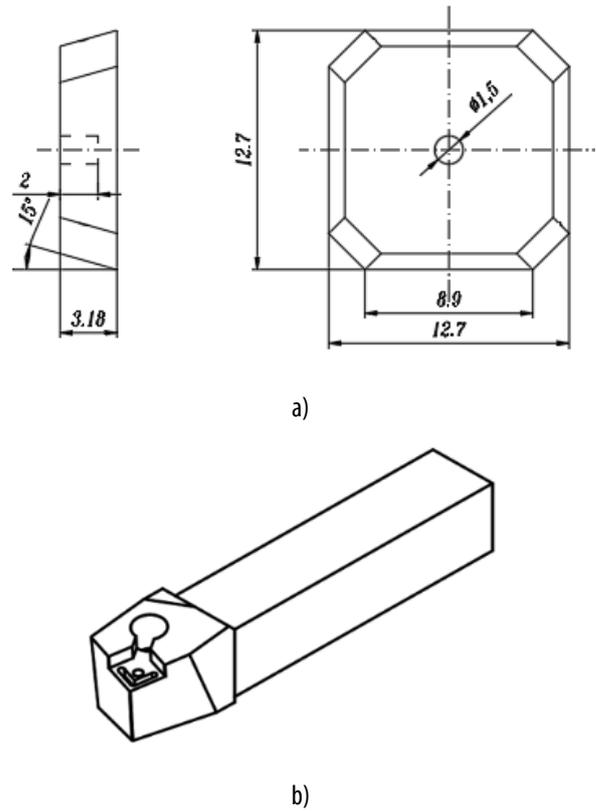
Solution B - L-shaped cooling channel on the tool holder
